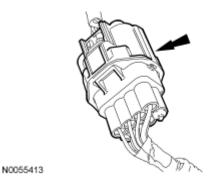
Identifying Battery Harness Electrical Connector Courtesy of FORD MOTOR CO.
